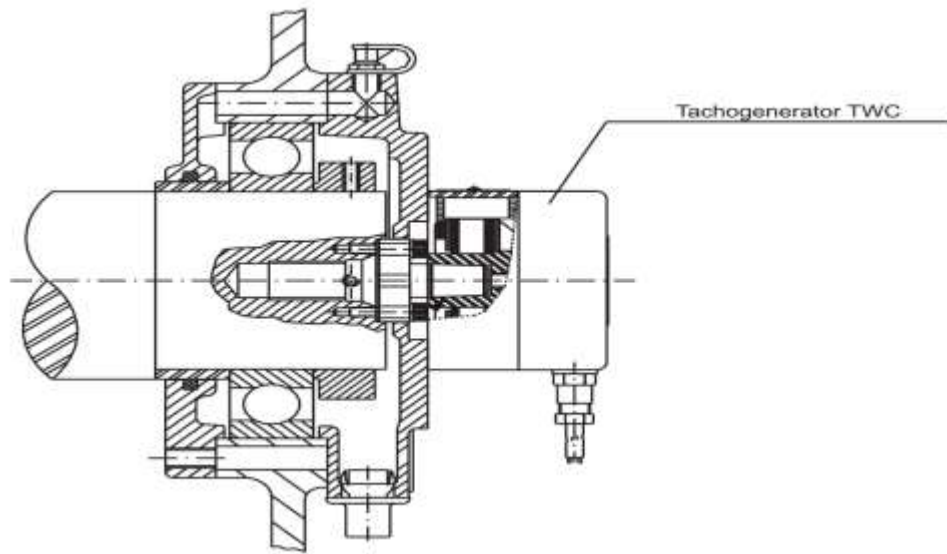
TCW Tachogenerator coupling system (Source: ibid)
